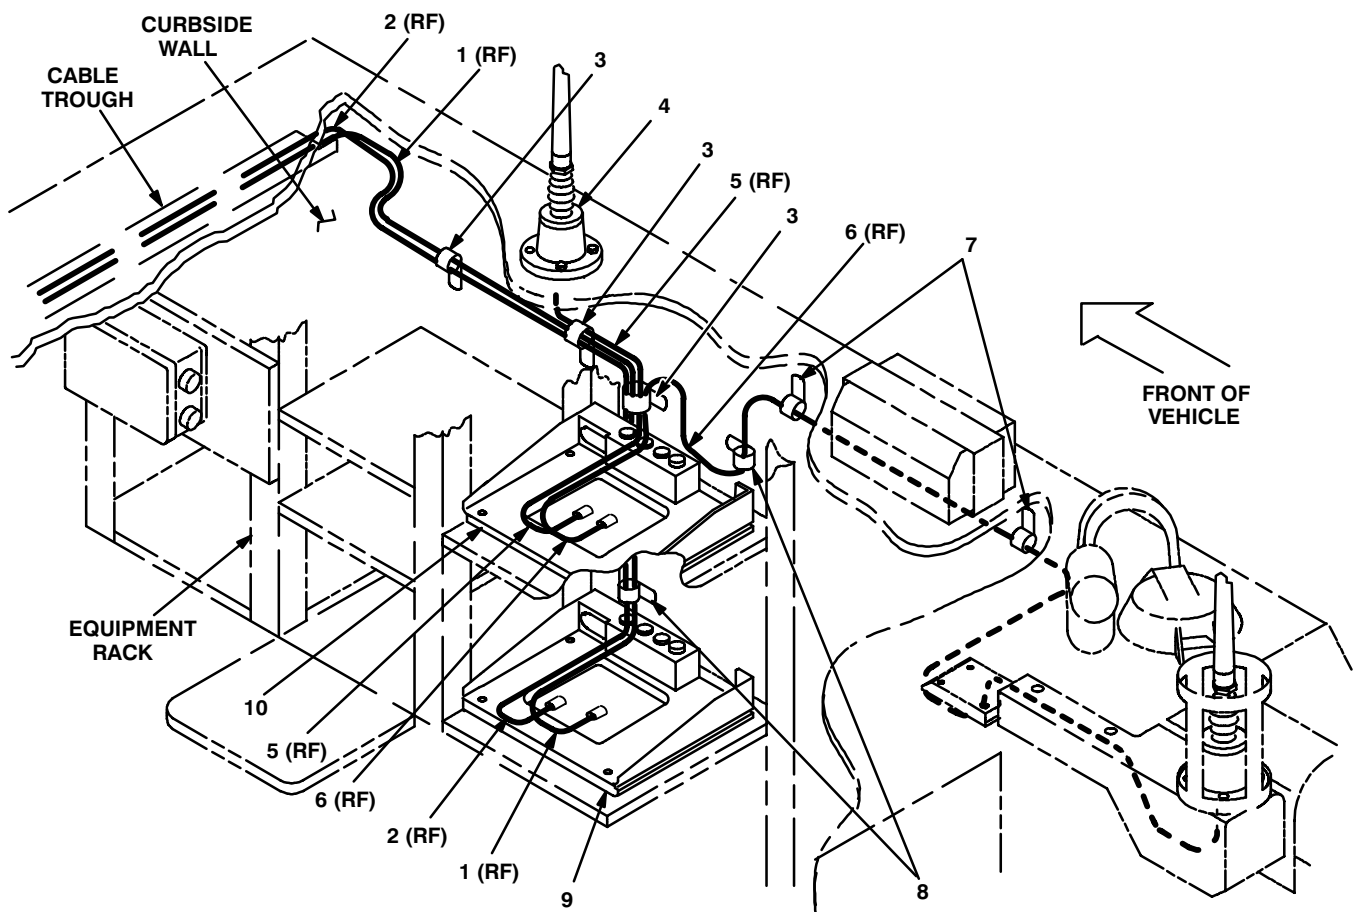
(1). Cable Installation: RF Cabling – Roadside Interior
